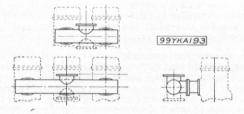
Water Cooled Welded Manifold Arrangement
